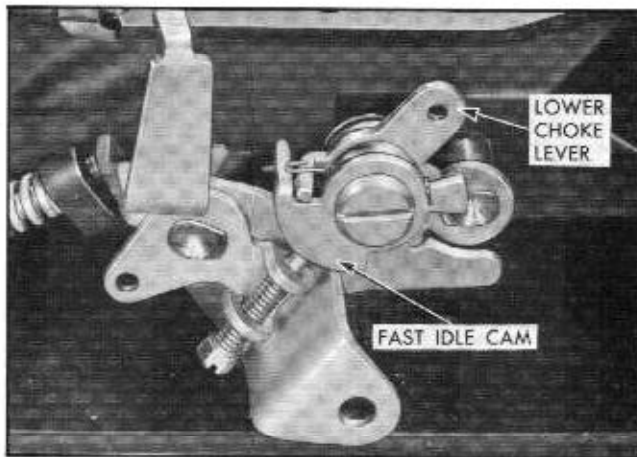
B-25 Fast Idle Cam and Secondary Lockout Assembly
